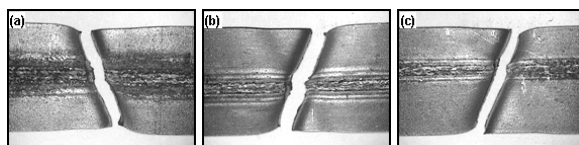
Appearance of fractured specimens after parallel tensile direction: (a)1.5m/min, (b)2.4m/min, (c)3.6m/min
